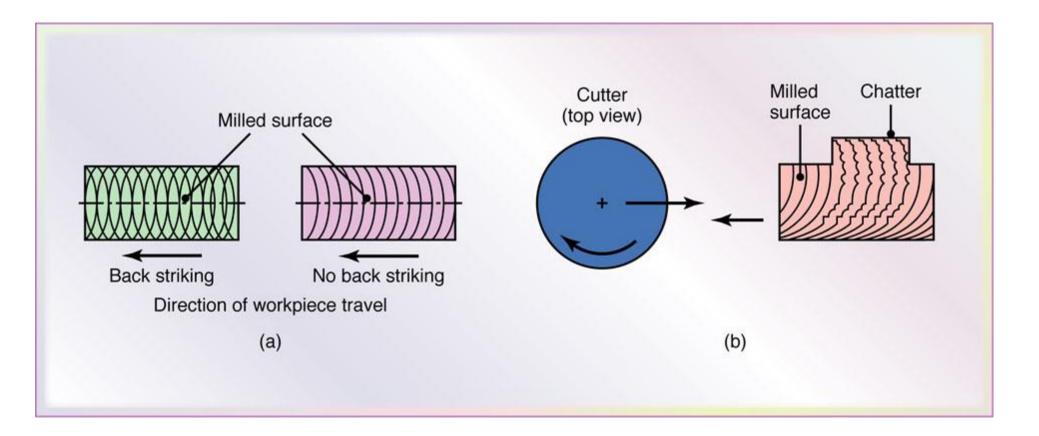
Machined surface features in face milling. See also Fig. 24.6.
